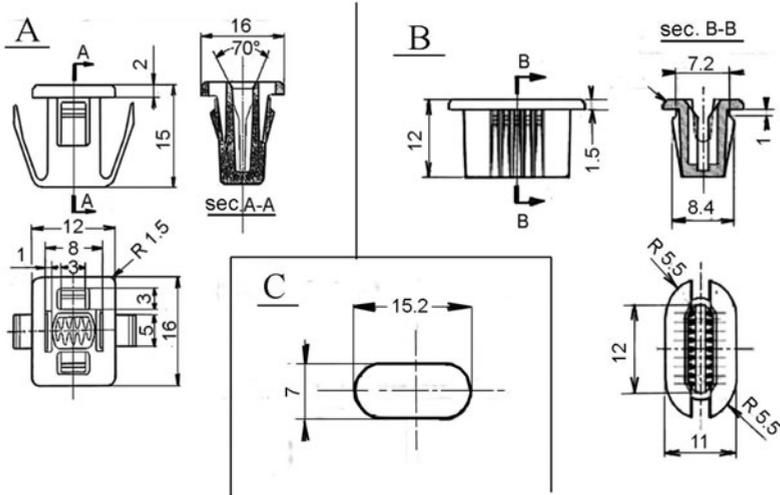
Examples of plastic clips for self threading screws (A and B) and slot design for supporting sheet (C).
